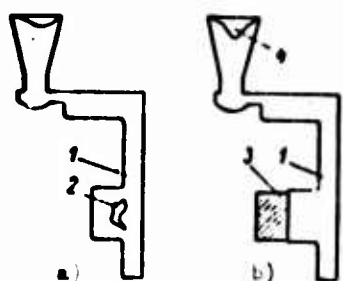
Preventing of formation of a shrinkage cavity by means of installation of a refrigerator in the thick part of the casting; a) casting, hardened without refrigerator; b) casting, hardened with refrigerator; 1 - casting; 2 - shrinkage cavity; 3 - refrigerator; 4 - shrinkage cavity, transferred to the flow gate ladle.
